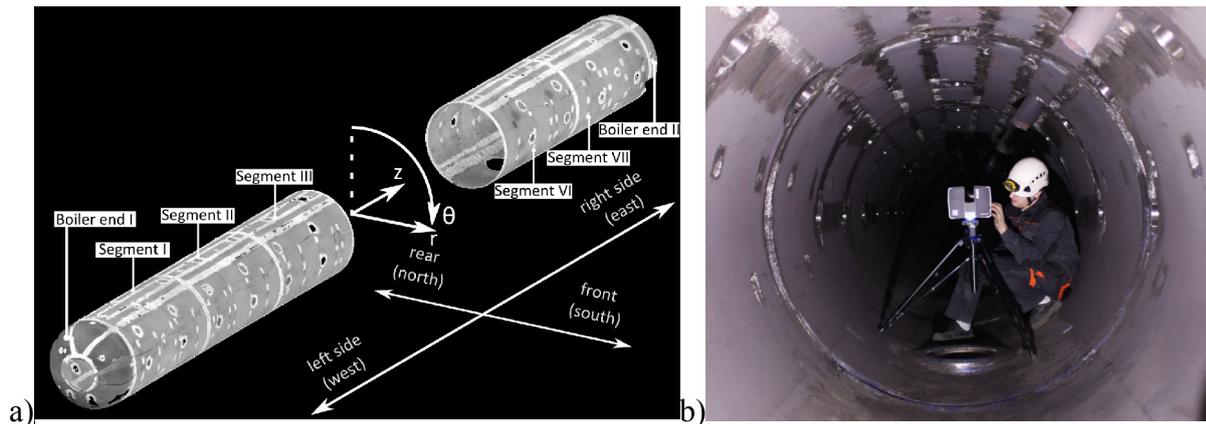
a) Point cloud of the measured boiler drum in the cylindrical coordinate system, b) ToF laser scanner during the measurements in the boiler drum.
